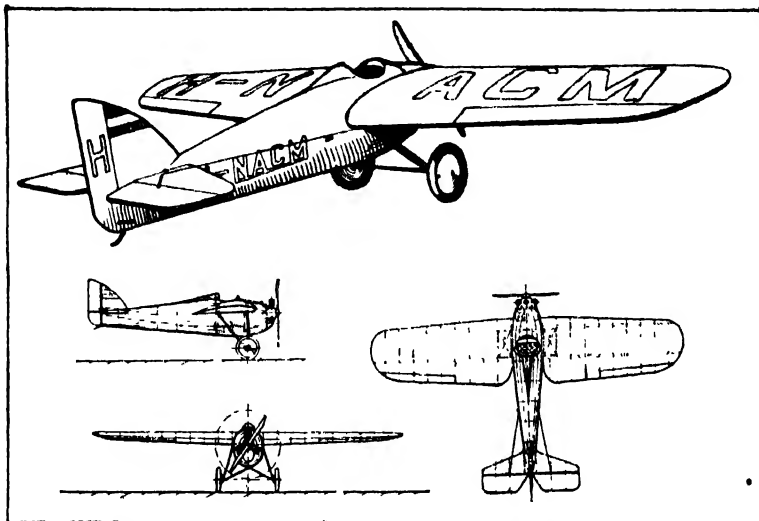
Perspective Drawing, Plan and Elevations of Pander Single Seat Monoplane.
